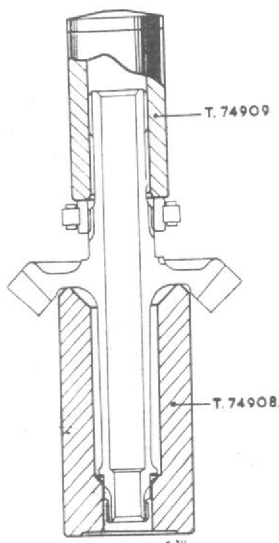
Pressing the roller bearing on to the horizontal drive shaft
